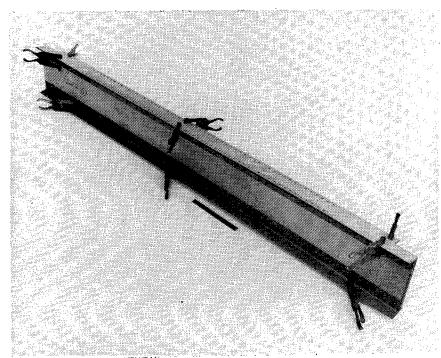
Partially Completed Spar Assembly Showing the Angles, Caps, Fillers, Web Skins and Honeycomb Core Clamped together ready for Bonding.
